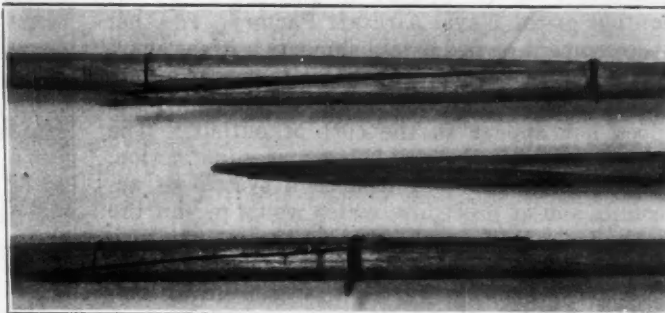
A TYPICAL FAILURE DUE TO SPIRAL GRAIN IN A SPRUCE STRUT
